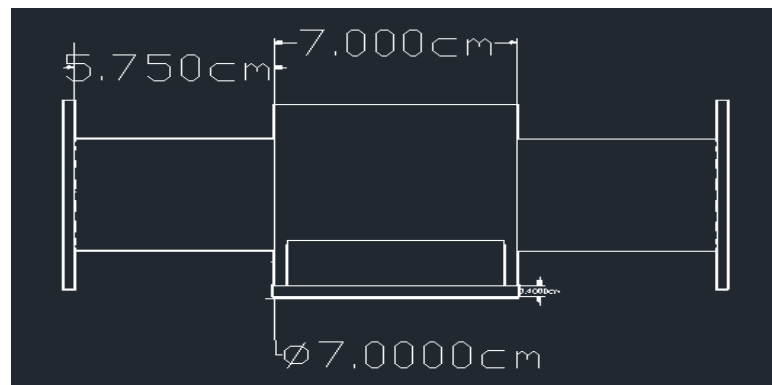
Final Design of Diesel Soot Trap Filter (Right View)
